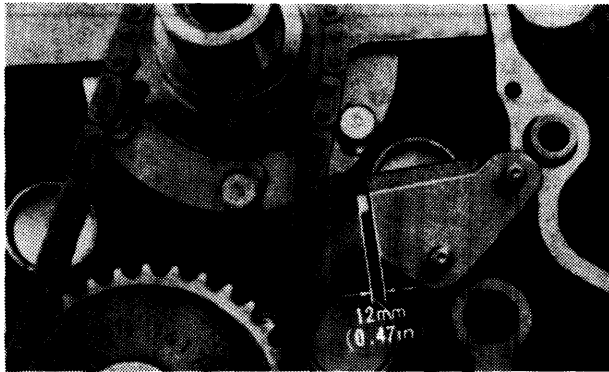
Measuring Oil Pump Drive Chain Tensioner Protrusion
